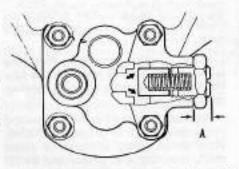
Turn adjusting screw in until and of screw is 9.902 mm (0.39 inch) (A) from pump body and secure locknut.
